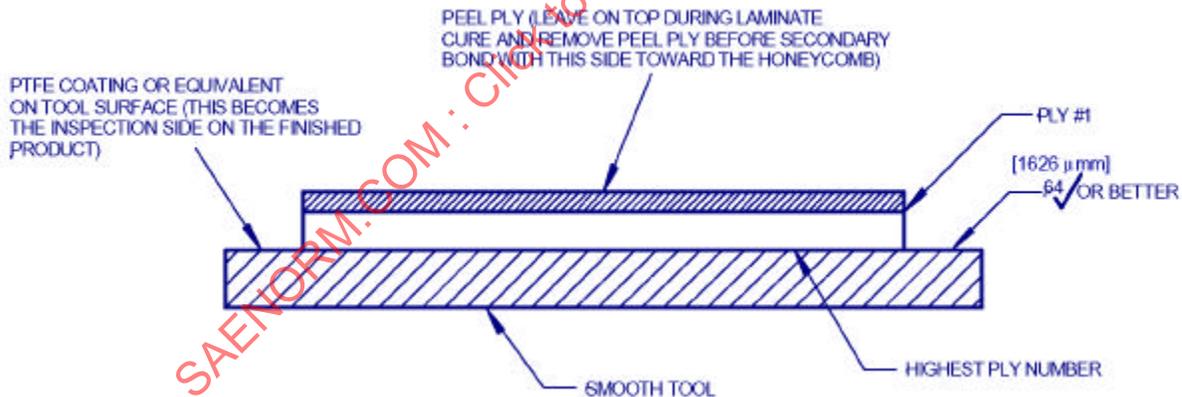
Laminate Lay-Up on Smooth Tool
